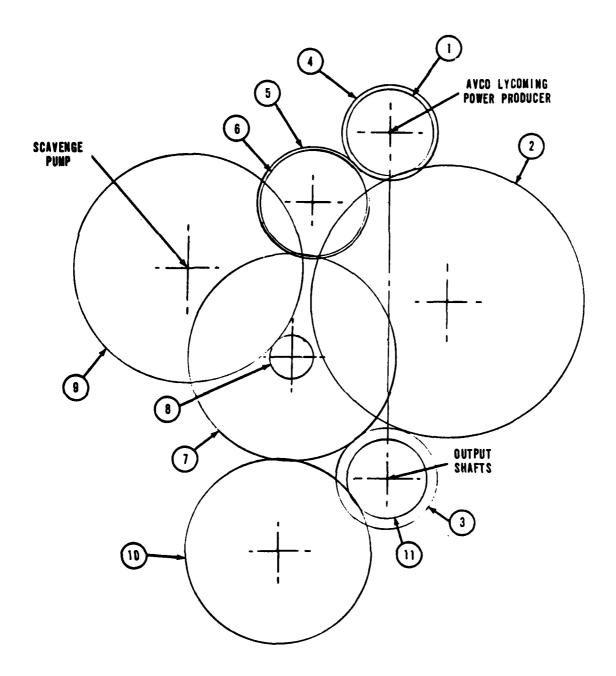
Adapter Gearbox Gear Schematic - Power and Accessory Train.
